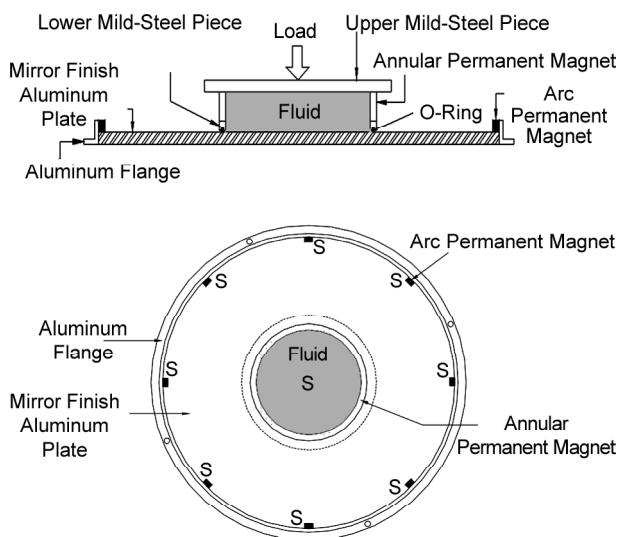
Side and plan views of hydromagnetic bearing, supporting plate, and peripheral accessories.
